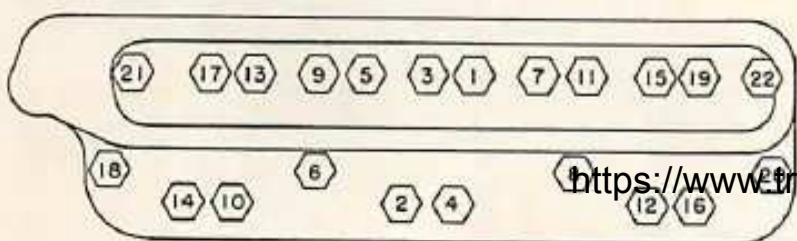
Cylinder head capscrew tightening sequence for Series 1600 and Series 1650 non-diesel engines. Tighten the oil cap screw to a torque of 96-100 Ft.-Lbs. and tighten all other cap-
